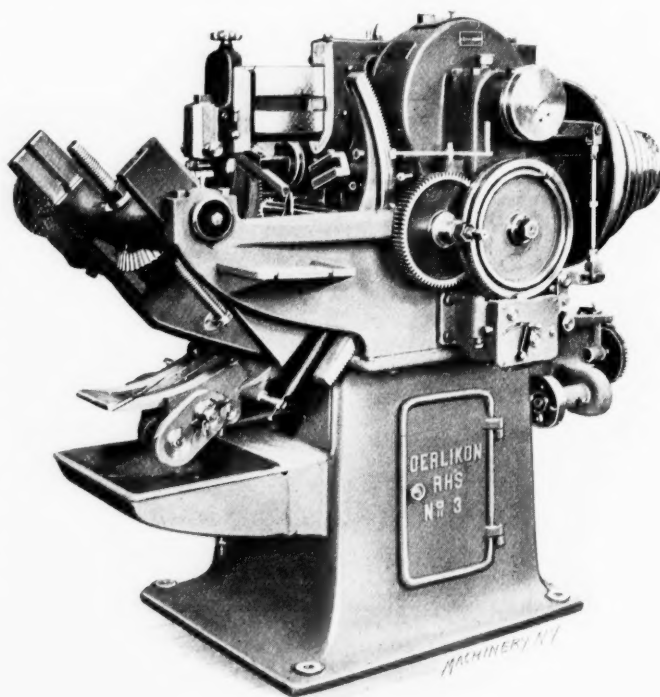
The Oerlikon Single-tool Templet Bevel Gear Shaper.
